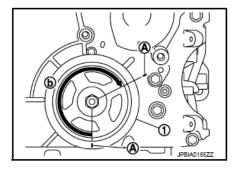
Rotating Crankshaft 240° Clockwise To Align No. 3 Cylinder At TDC Courtesy of NISSAN NORTH AMERICA, INC.
